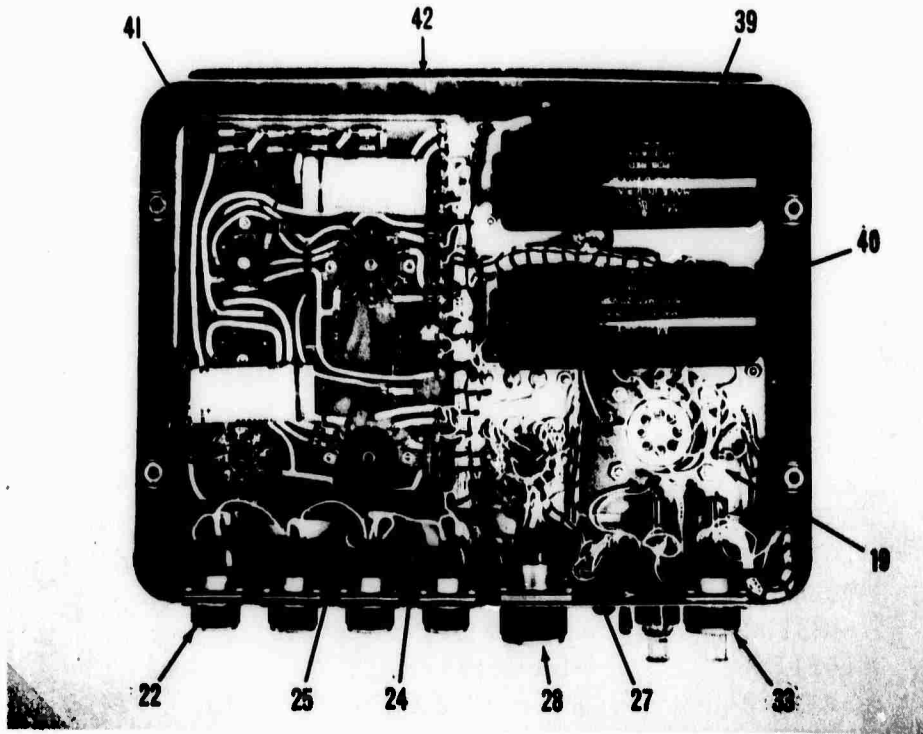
Power supply assembly parts identification (sheet 2 of 2) G 2659
